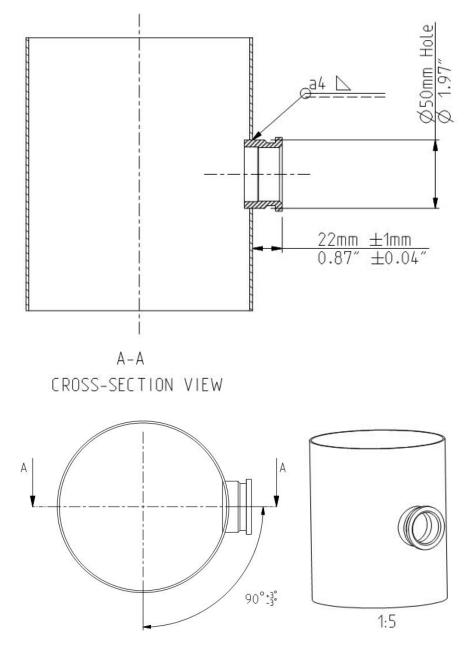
Process coupling welding instruction to process pipe PN10.
